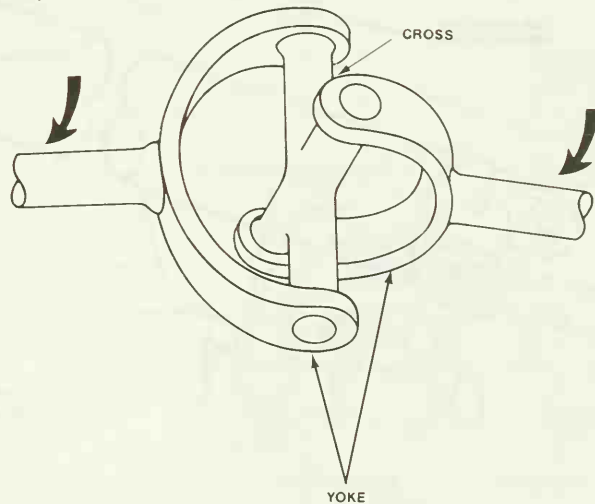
A simplified universal joint. (Chevrolet Motor Division of General Motors Corporation)
